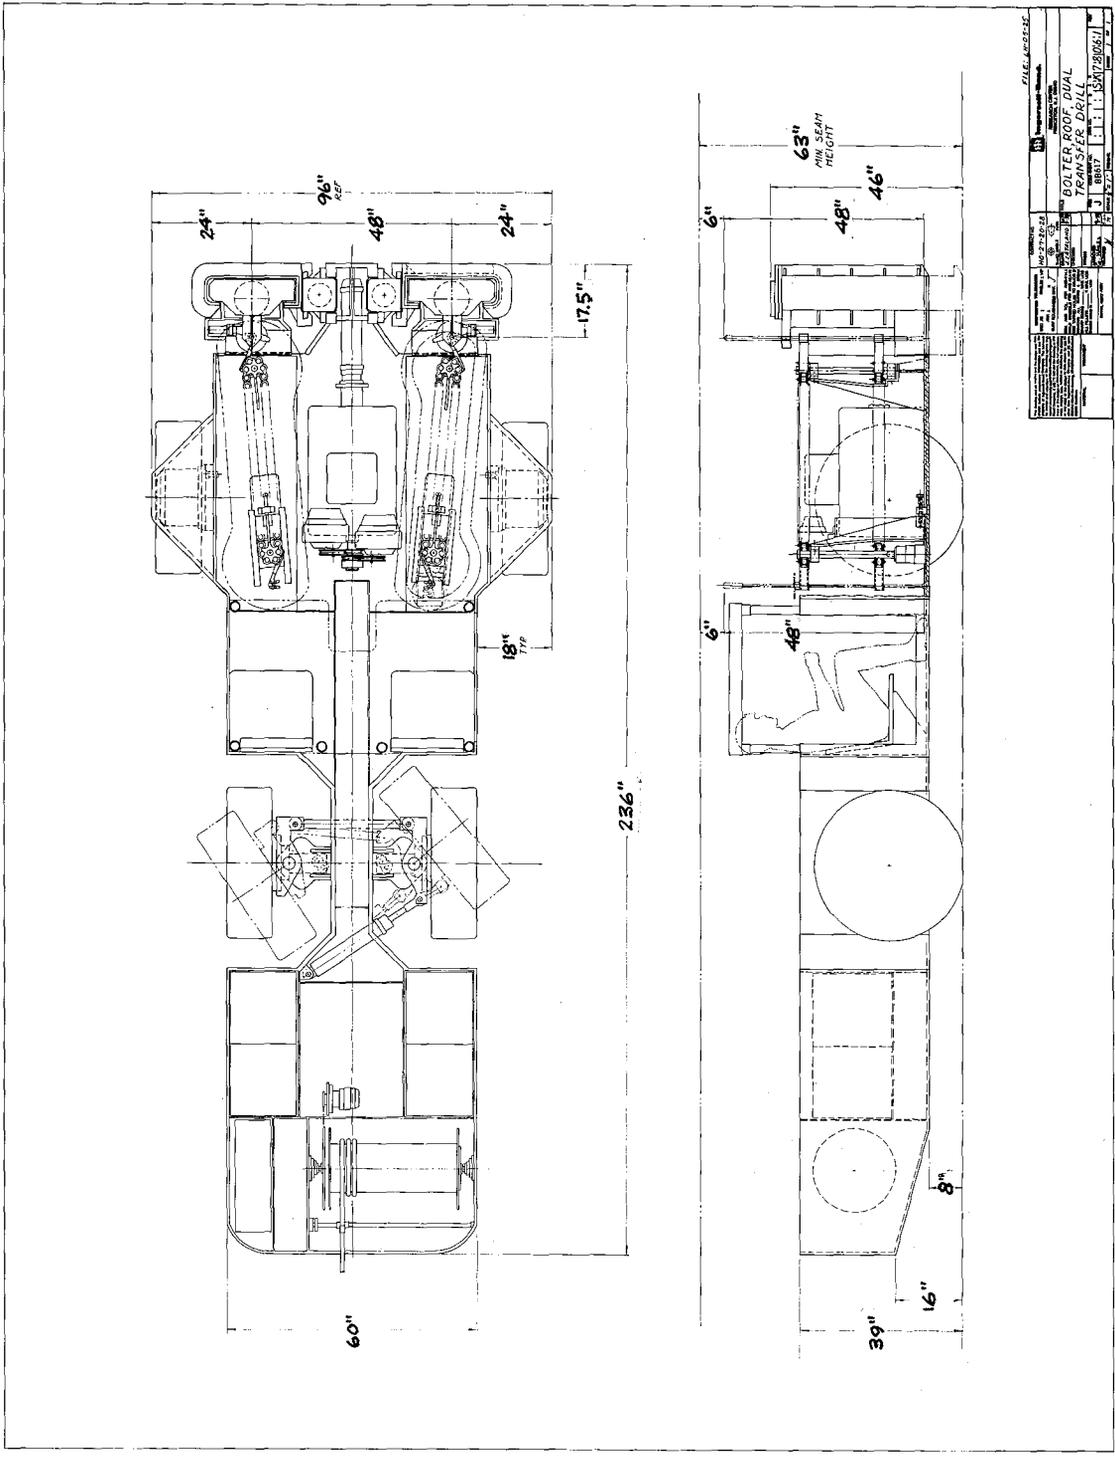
Plan and Elevation Views of the Transfer Bolter - Dual Boom (New Chassis)
